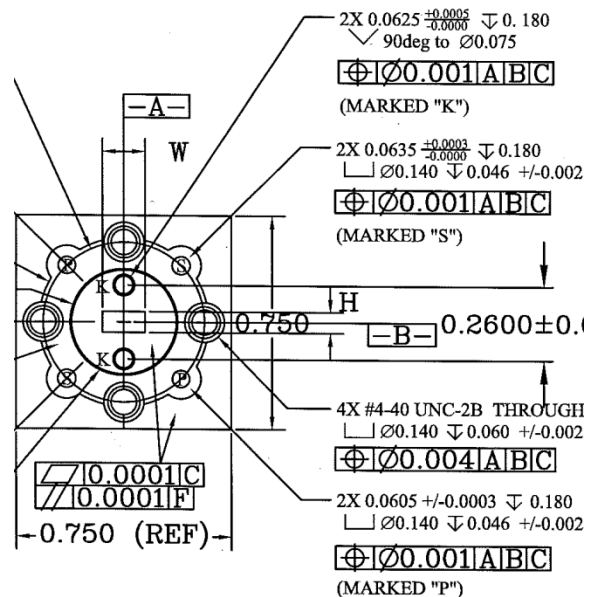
Engineering drawing extract of the flange used for this investigation. The inner dowel hole diameter value (0.0625") is shown in the top right-hand corner of the drawing
